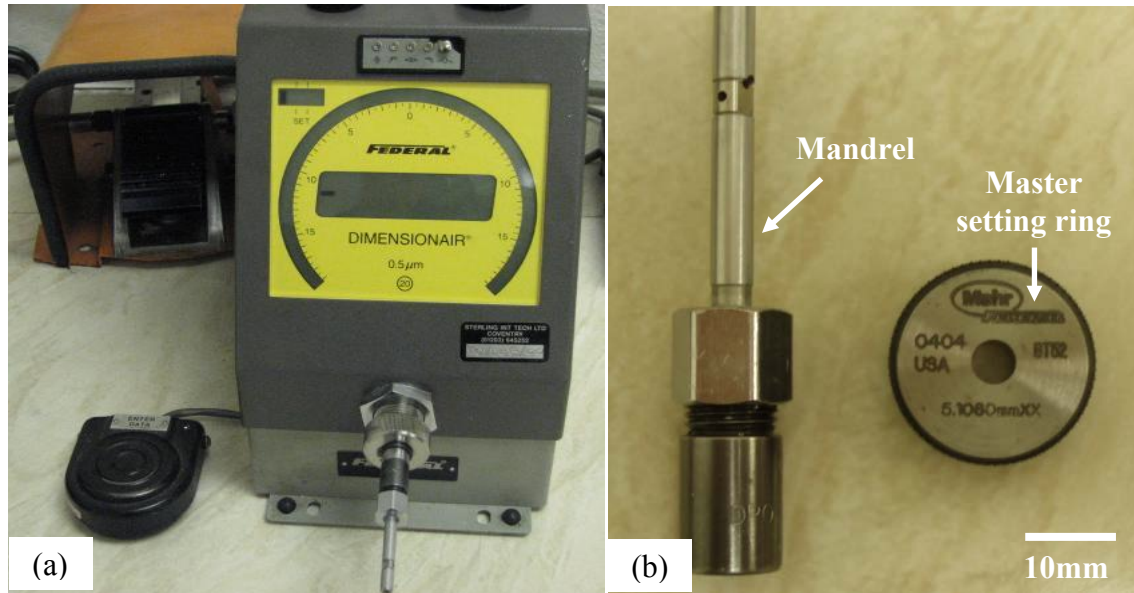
Hole diameter measurement equipment (a) Mahr air gauge unit and (b) mandrel with setting ring
